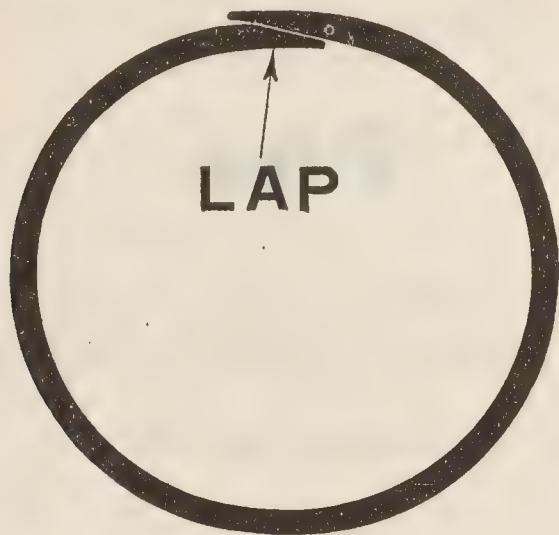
,048.—Lap weld process. The skelp used in making lap welded tubes is rolled to the necessary width and gauge for the size tubes to be made, the edges being scarfed and overlapped when the skelp is bent into shape, thus giving a comparatively large welding surface, compared with the thickness of the plate. The skelp is first heated to redness in a "bending furnace," and then drawn from the front of the furnace through a die, the inside of which gradually assumes a circular shape, so that the skelp when drawn through is bent into the form of a tube with the edges overlapping as shown. The skelp so formed is heated evenly to the welding temperature in a regenerative furnace. When the proper temperature is obtained, the skelp is pushed through an opening in the front of this furnace into the welding rolls, passing between two rolls set one above the other, each having a semi-circular groove, so that the two together form a circular pass. Between these rolls a mandrel is held in position inside the tube, the lapped edges of the skelp being firmly pressed together at a welding heat between the mandrel and the rolls. The tube then enters a similarly shaped pass to correct any irregularities and to give the outside diameter required. It will be noted that the outside diameter is fixed by these rolls; any variation in gauge, therefore, makes a proportional variation in the internal diameter. This also applies to butt weld pipe. Finally, the tube is passed to the straightening, or cross rolls, consisting of two rolls set with their axes askew. The surfaces of these rolls are so curved that the tube is in contact with each for nearly the whole length of the roll, and is passed forward and rapidly rotated when the rolls are revolved. The tube is made practically straight by the cross rolls, and is also given a clean finish with a thin, firmly adhering scale. After this last operation, the tube is rolled up an inclined cooling table, so that the metal will cool off slowly and uniformly without internal strain. When cool enough, the rough ends are removed by cold saws or in a cutting off machine, after which the tube is ready for inspection and testing. In the case of some sizes of double extra strong pipe (3 inch to 8 inch), made by the lap weld process, the pipes are first made to such sizes as will telescope one within the other, the respective welds being placed opposite each other; these are then returned to the furnace, brought to the proper heat, and given a pass through the welding rolls. While a pipe made in this way is, in respect to its resistance to internal pressure, as strong or stronger than when made from one piece of skelp, it is not necessarily welded at all points between the two tubular surfaces; however, each piece is first thoroughly welded at the seam before telescoping.
